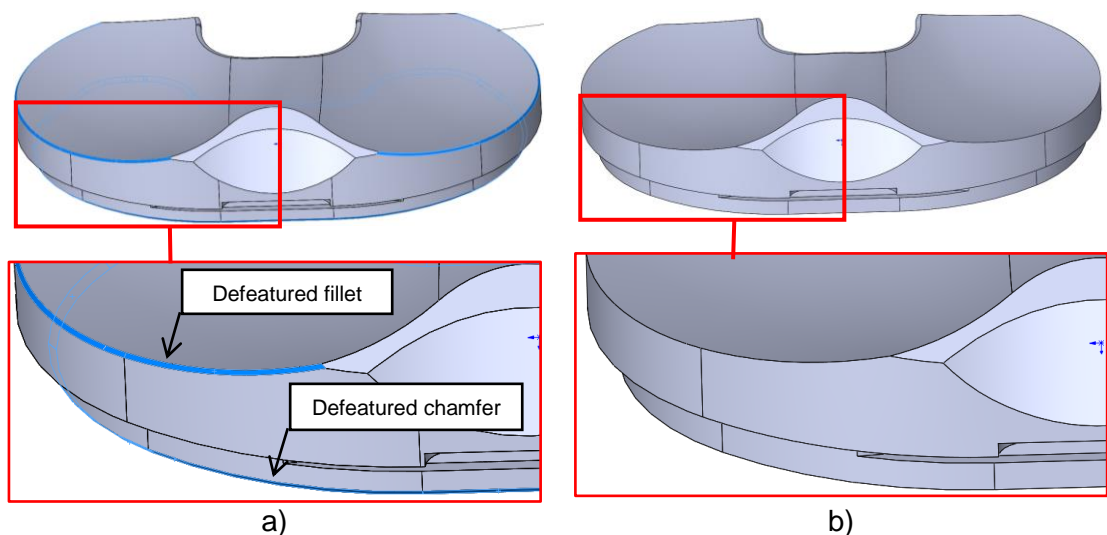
Tibial insert a) geometry with chamfers and fillets (highlighted in blue) and b) defeatured geometry without chamfers and fillets on the top and bottom faces.
